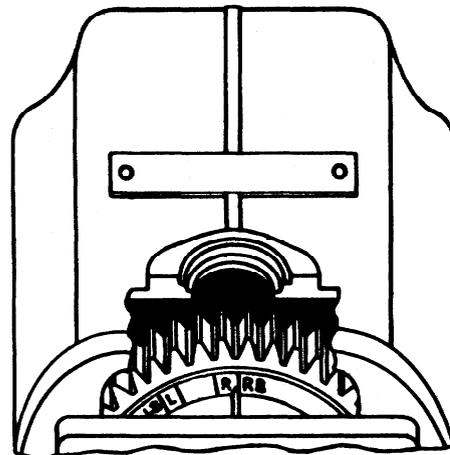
Alignment of Timing Mark on Distributor Gear – 6 Cylinder, Retard Breaker, Right Hand Rotation
